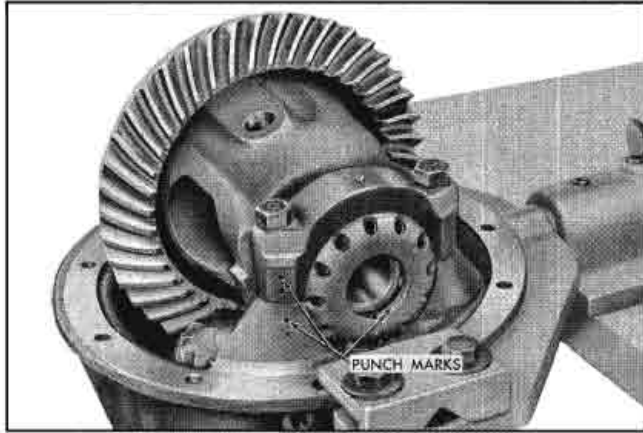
Bearing Cap and Adjusting Nut Marked for Side Location
